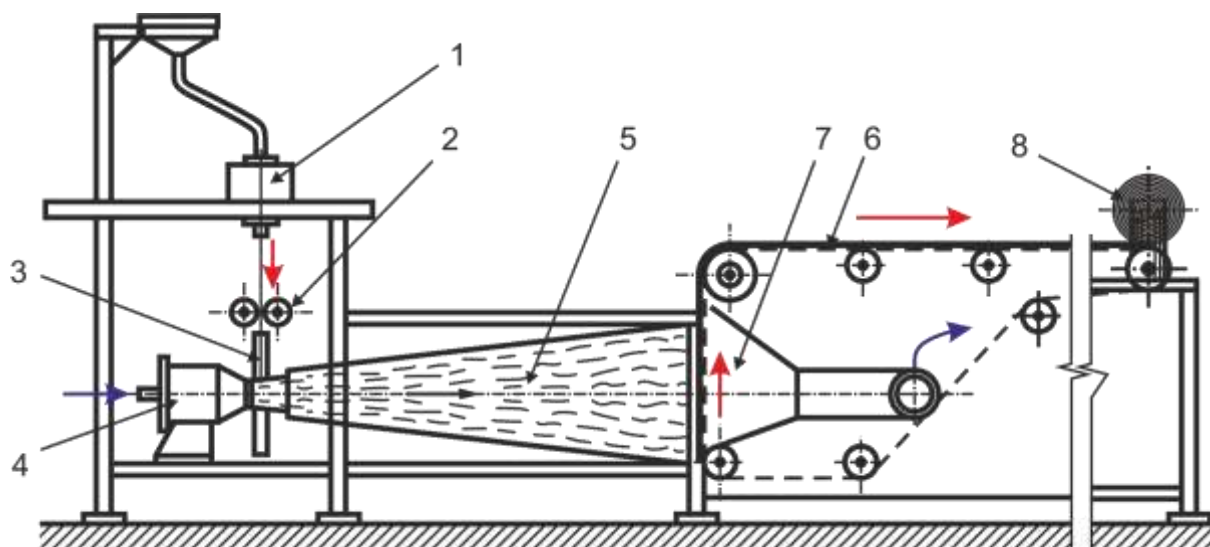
Diagram of the line for the production of very fine fibre: 1 - platinum furnace, 2 - drawing rollers, 3 - guide plate, 4 - blow chamber, 5 - diffuser, 6 - belt mesh conveyor, 7 - suction, 8 - winding device
